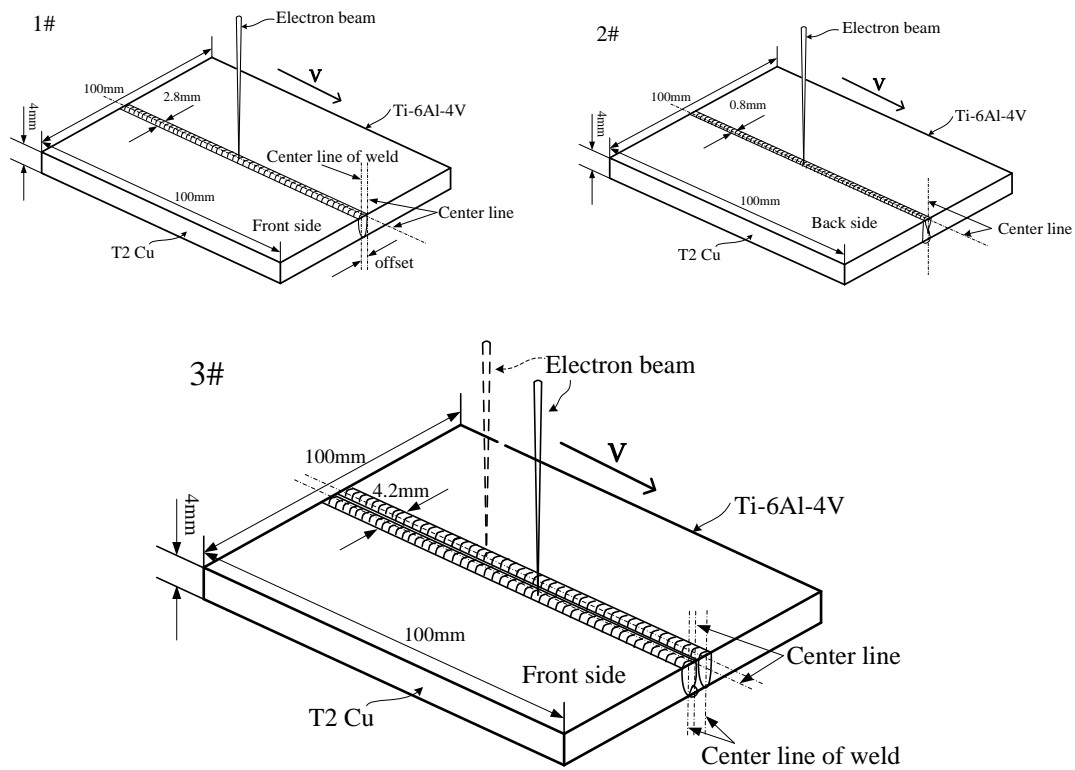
Schematic diagram of welding process with adjacent welding of front side: 1# non-centered welding (welding-brazing), 2# root welding, 3# adjacent welding. Detailed welding parameters are shown in Tab.3.
